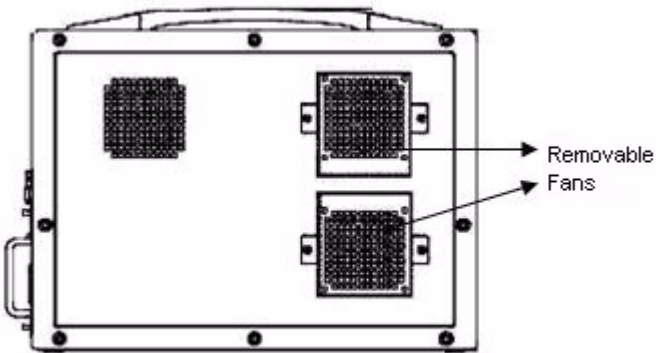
PXIS-2680P Mechanical Drawing
